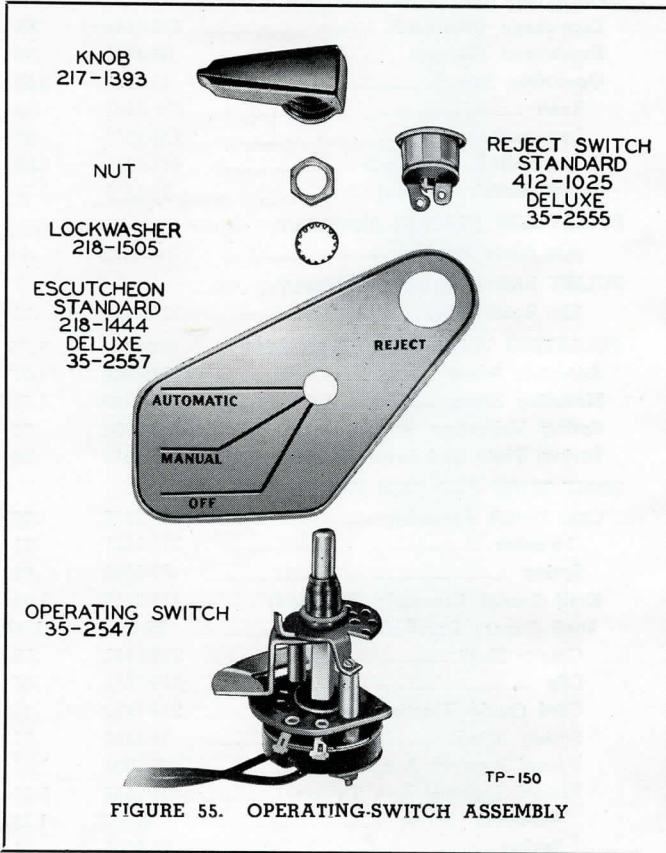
OPERATING-SWITCH ASSEMBLY
